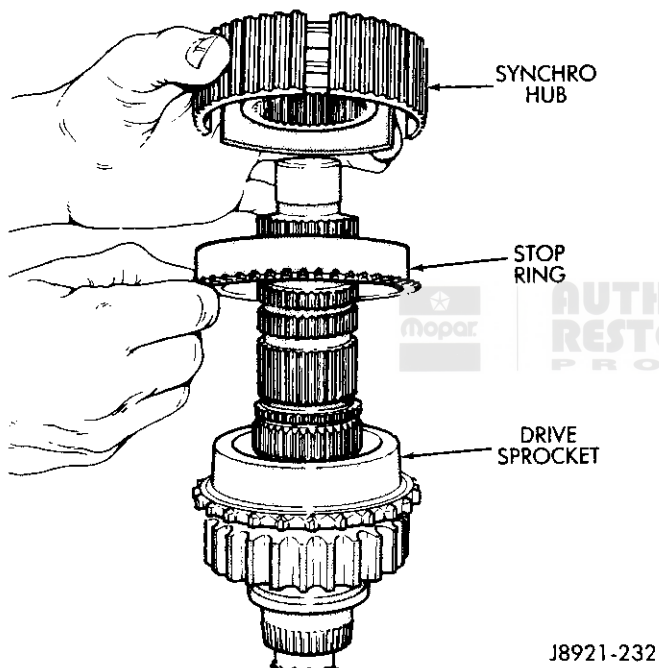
Drive Sprocket, Stop Ring And Synchro Hub Installation
